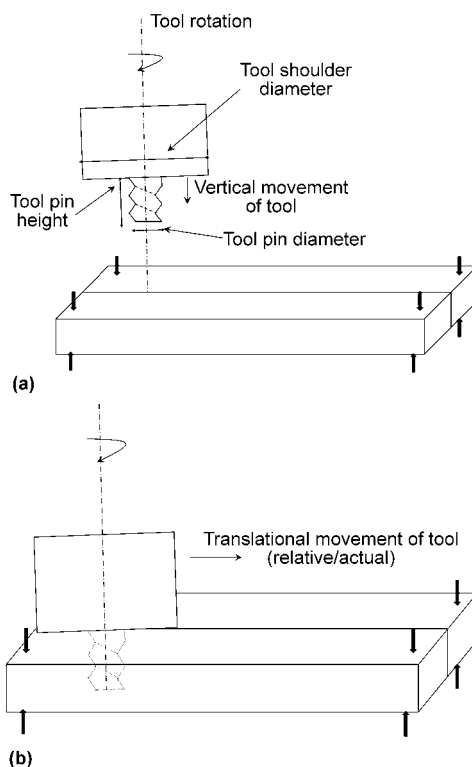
(a) Schematic of a friction stir tool being inserted into the workpiece. The process is also sometimes called the plunge period of welding. The workpiece is clamped firmly to prevent any movement. The tool rotation direction and the pin thread handedness are adjusted such that material is pushed downward. (b) The tool fully plunged into the workpiece is moved along the seam while it is rotating, which consequently leads to welding due to mixing of metals in a plasticized state.
